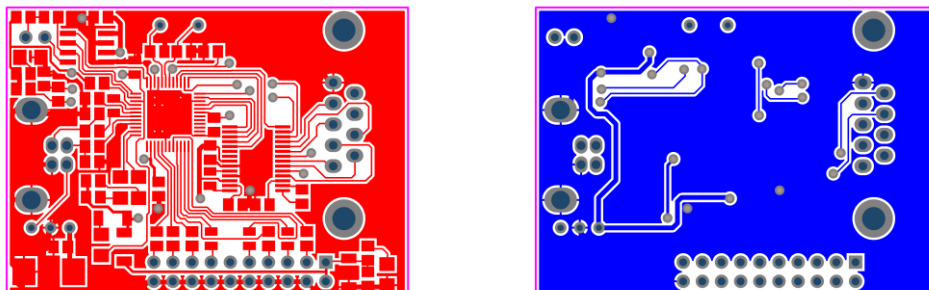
The layout of the OpenOCD debugger, top layer (left) and bottom layer (right)
